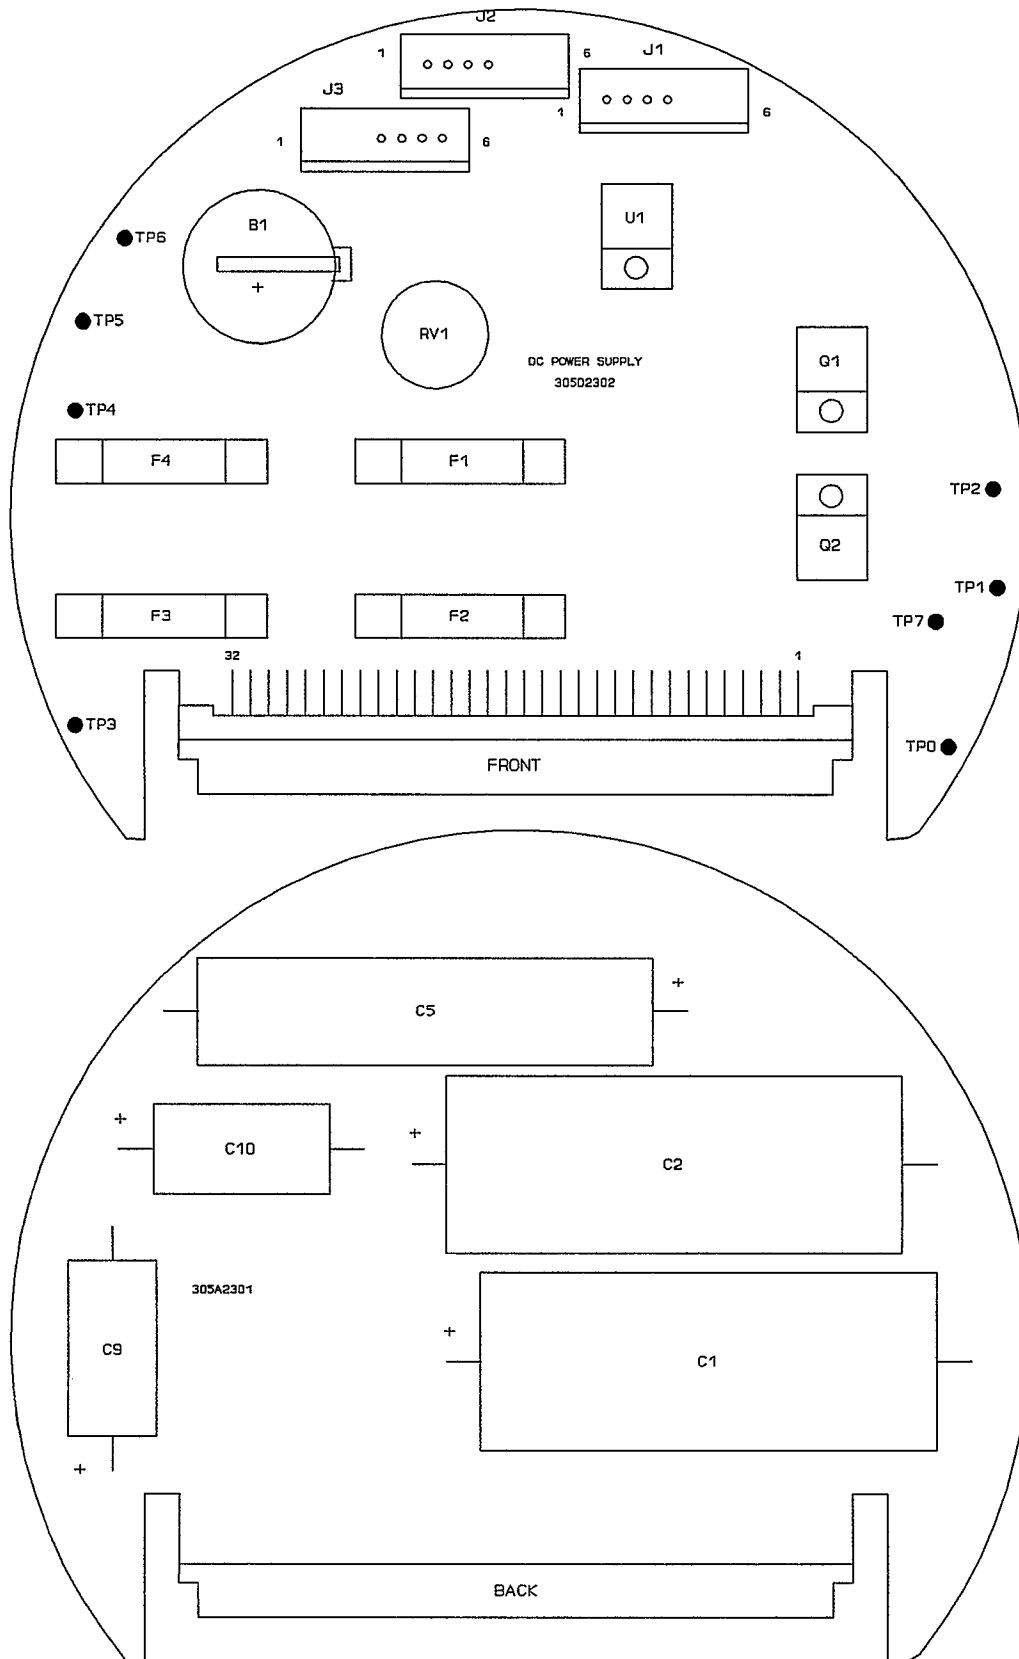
DC Power Supply PCB Layout (Front and Back)
